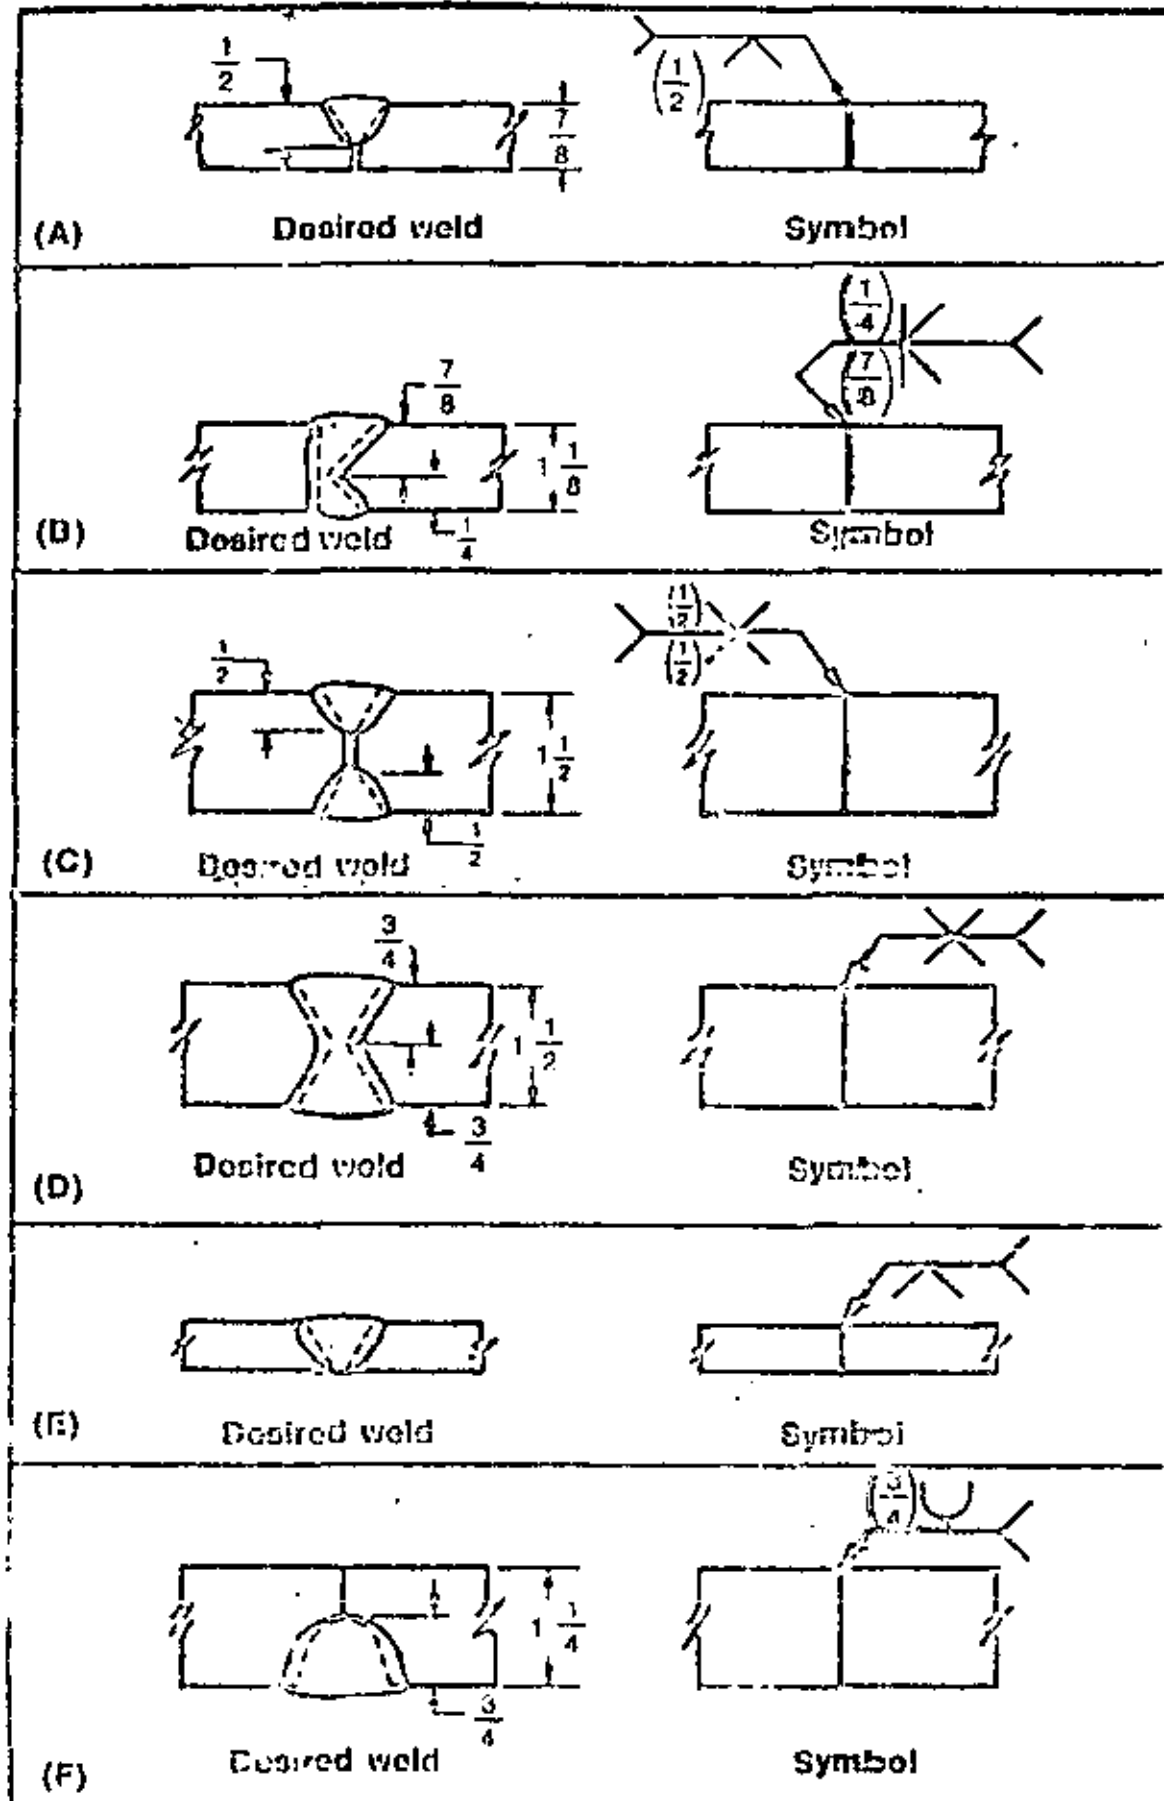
Designation of effective throat of groove welds, size of bevel not specified.
